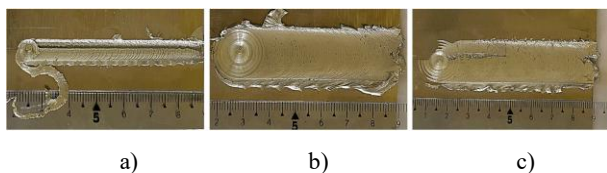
The top view images of the welds made with Tool 1 are as follows: a) 80 mm/min; b) 125 mm/min; c) 150 mm/min
